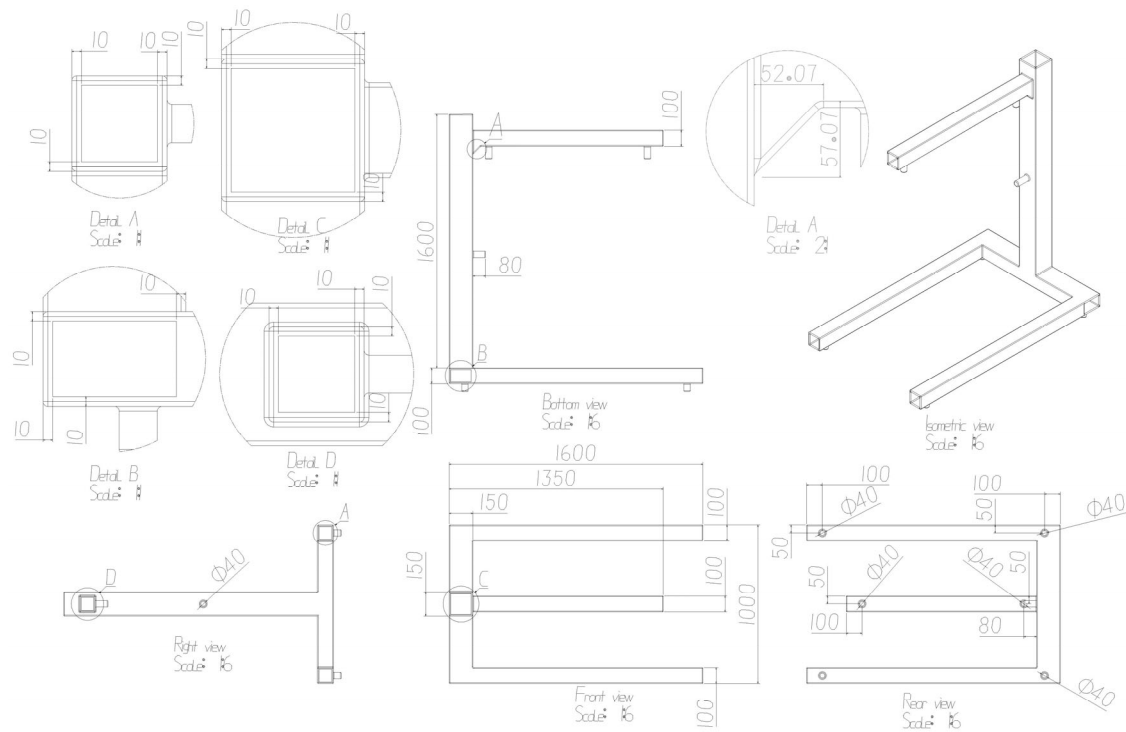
DIMENSIONS FOR THIRD DESIGN OF FLOOR CRANES
